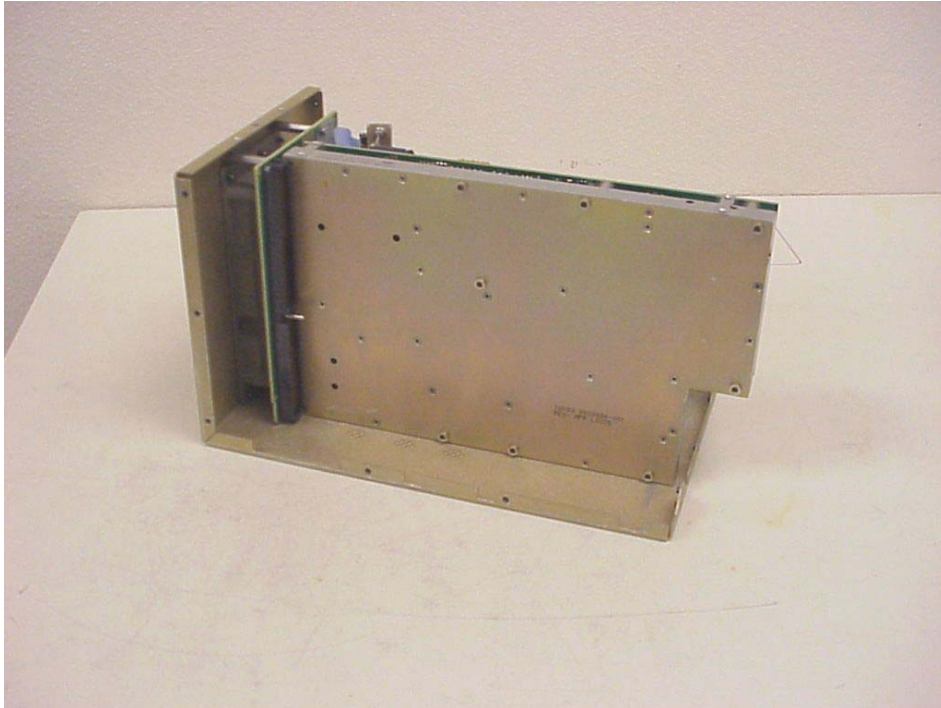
Right Side View of 6 MCU Unit, Covers Removed
